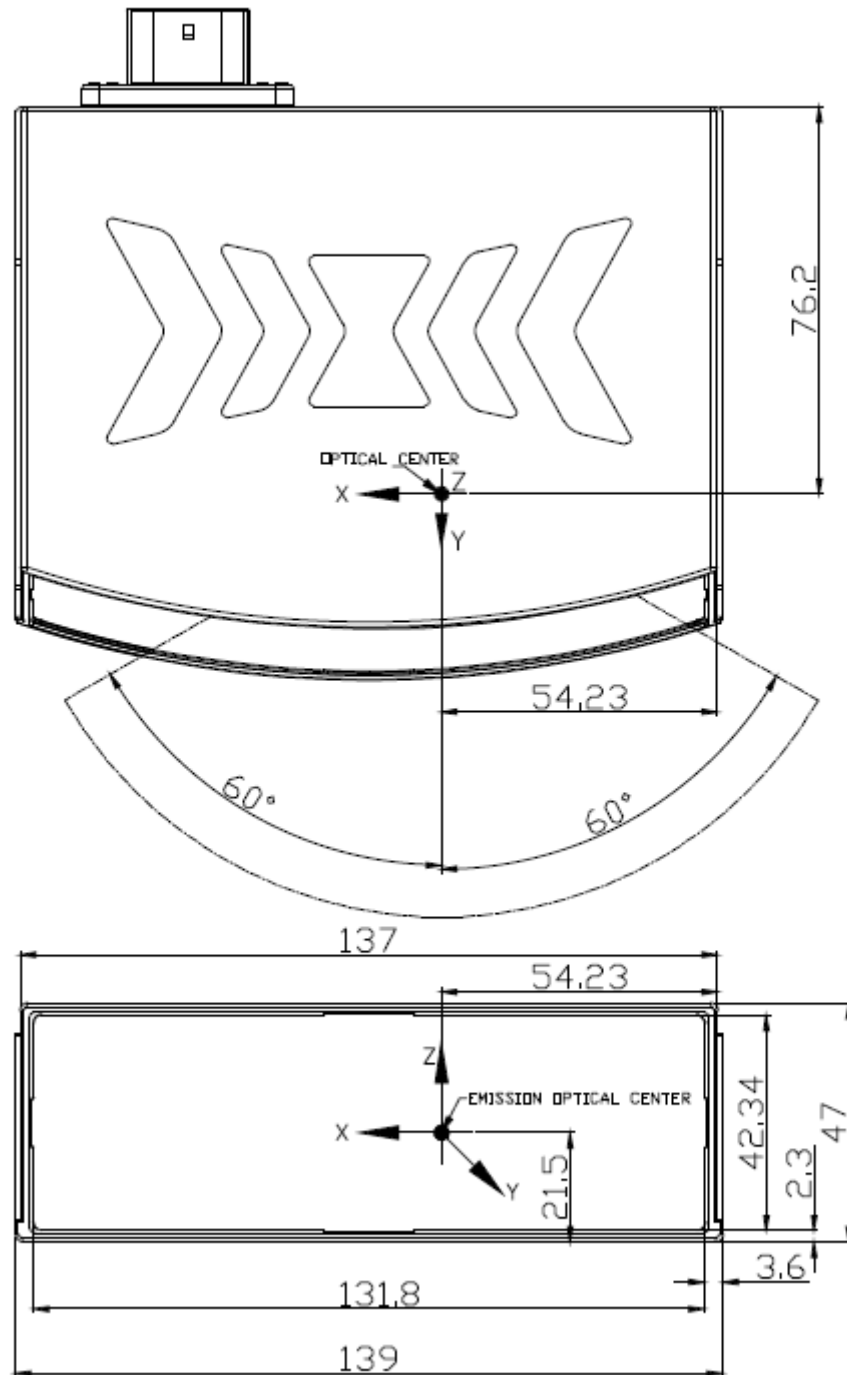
CX128S2 Lidar Dimension (unit: mm)
